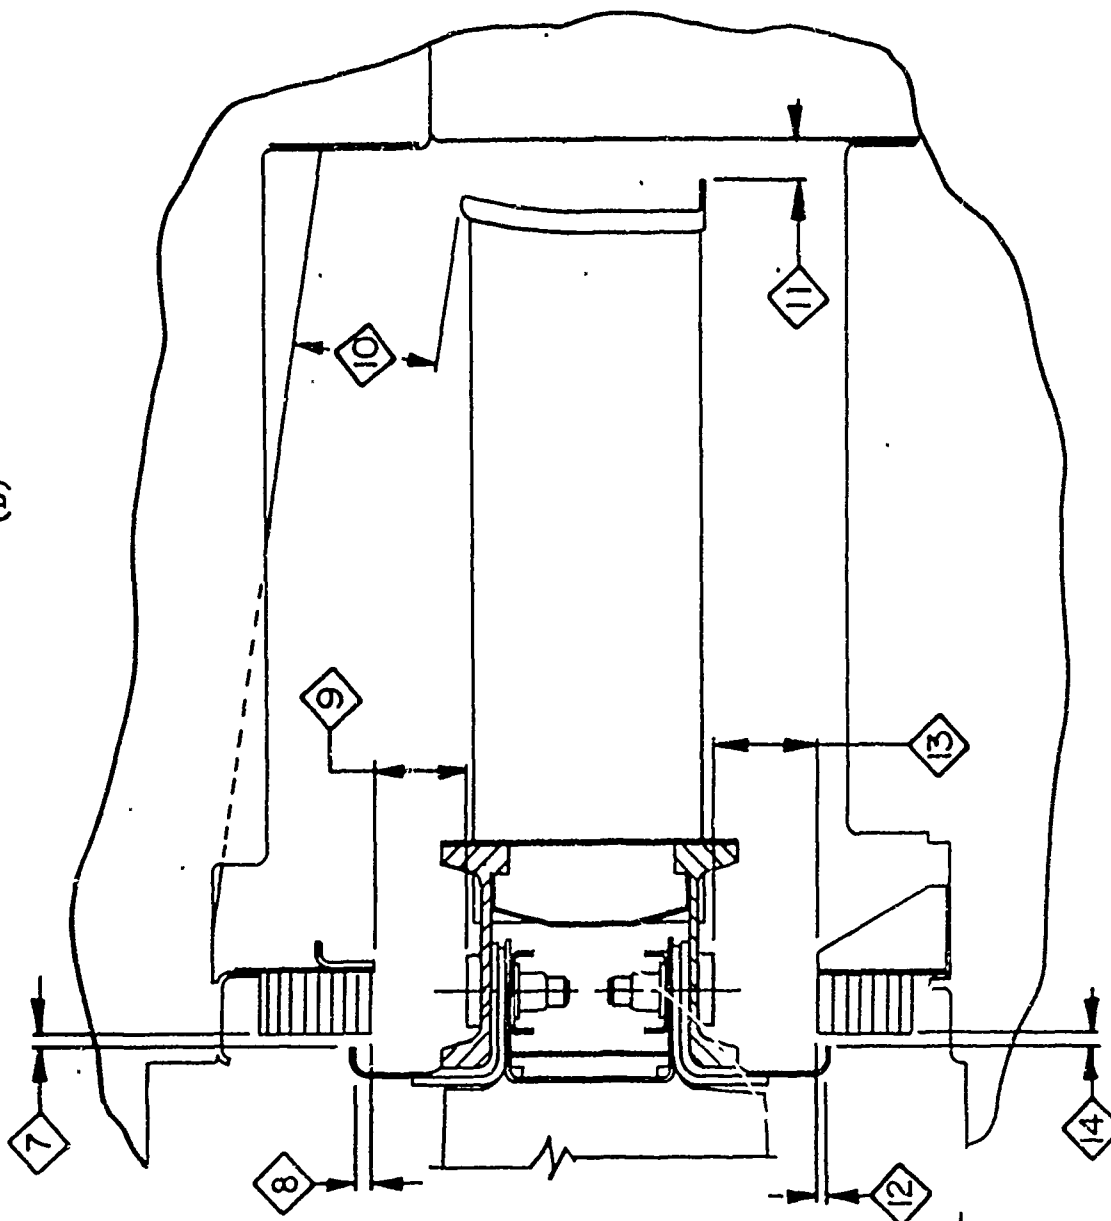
B Rotor Bearing and Speed Sensor Clearance Inspection
